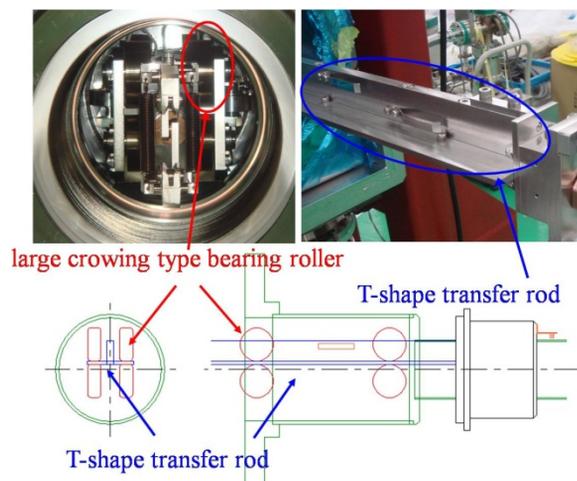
Photographs and schematic diagram of the TR1 and the bearing rollers.
